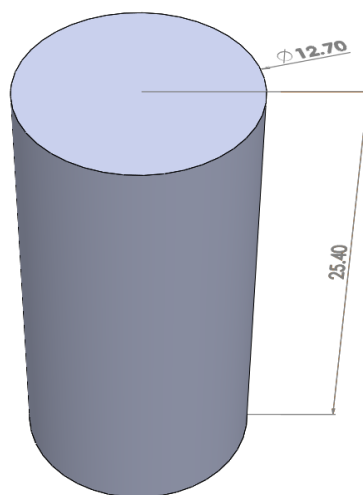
Geometry and dimensions of the cylindrical sample for compression tests (ASTM-D695).
